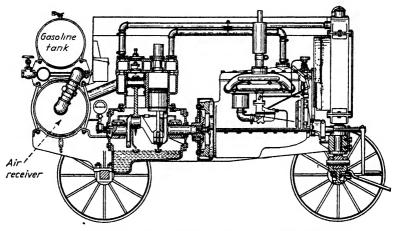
Sectional view of gasoline-engine-driven portable unit.
